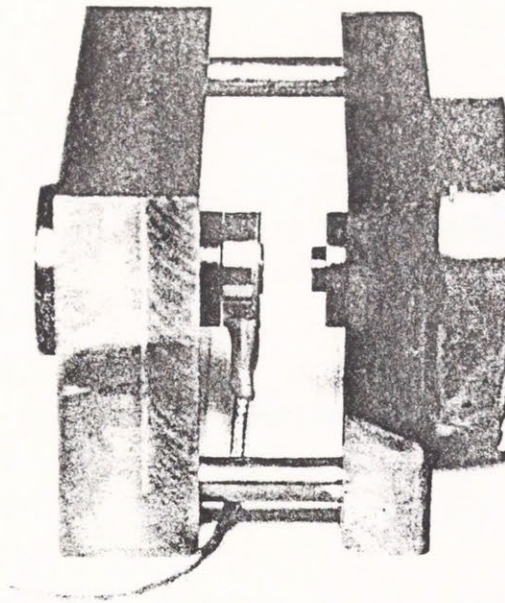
Load washer fixture. Side view showing load washer, hardened steel inserts and guide pins. Also seen are an R5 drawing die (left) and the drawbox mounting fitting (right).
